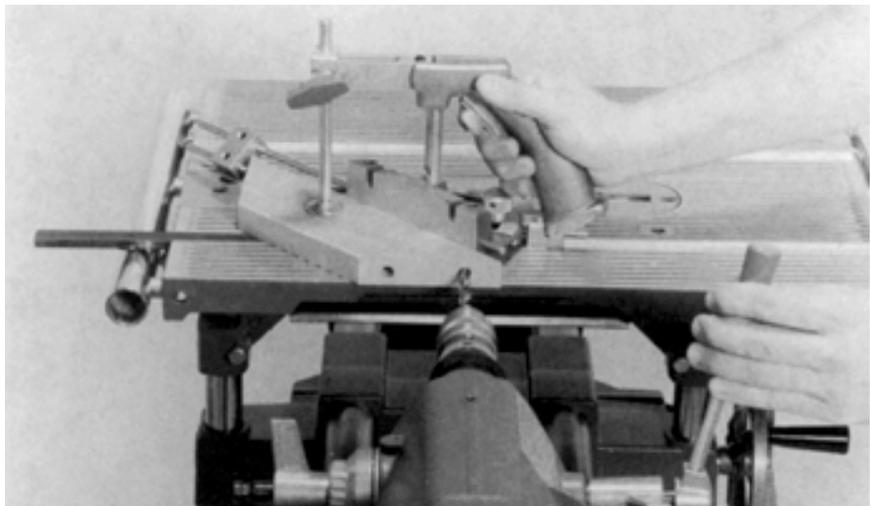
You can also bore at an angle by using the miter gauge. The miter gauge stop rod can be used to keep the bit from pushing the stock out of alignment.
